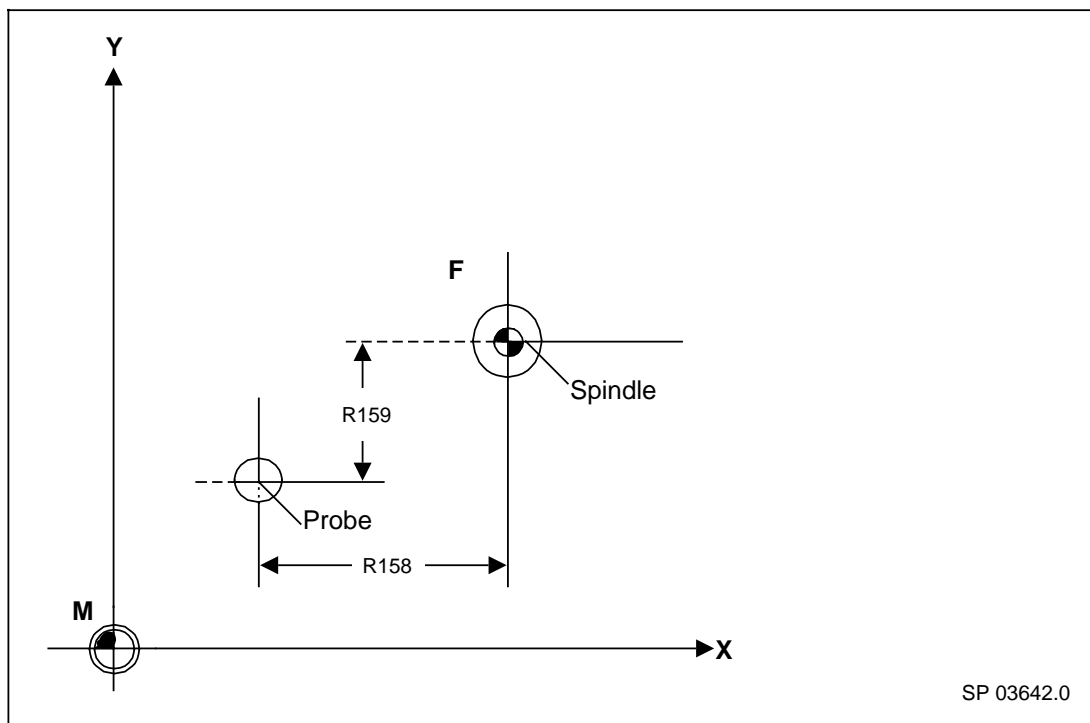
Workpiece probe arranged offset from spindle centre
